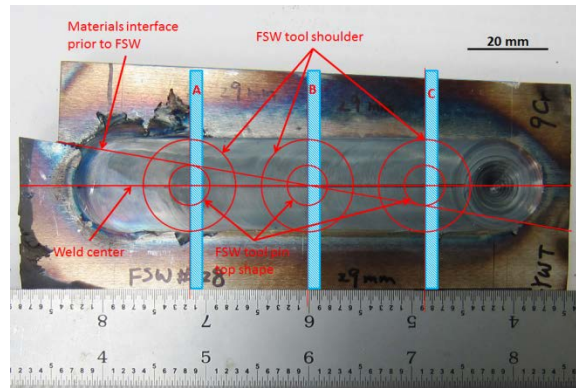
Dissimilar materials 14YWT ODS alloy & modified 9Cr steel FSW joint
